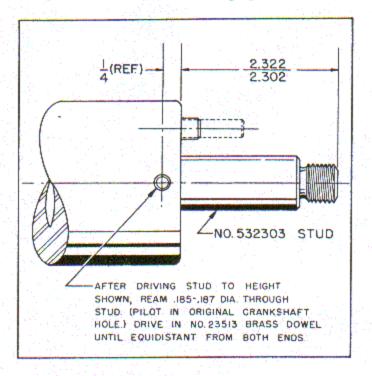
Installation Dimensions of Starter Jaw Retaining Stud
